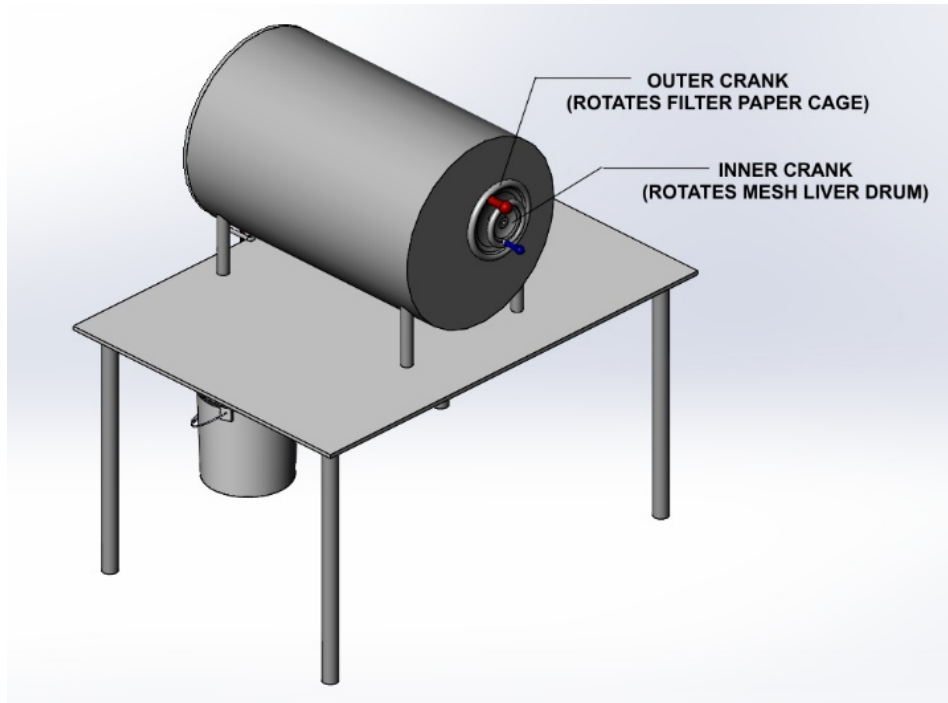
Rendering assembly rear – cranks for rotating the inner assembly
